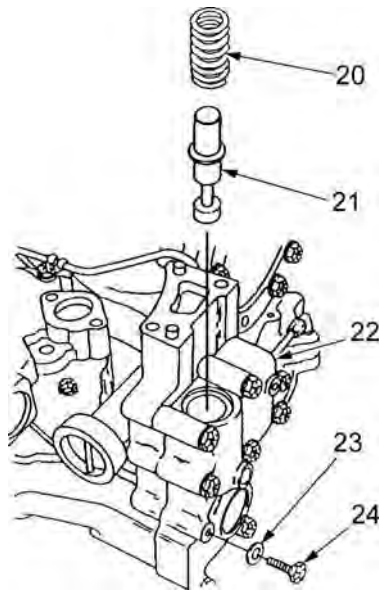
Push-Start Valve Body (Check Valve Body) Removal.
